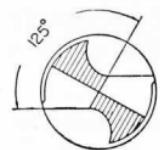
Crankshaft-Point Deep-hole Drilling (Note Heavy Web)
